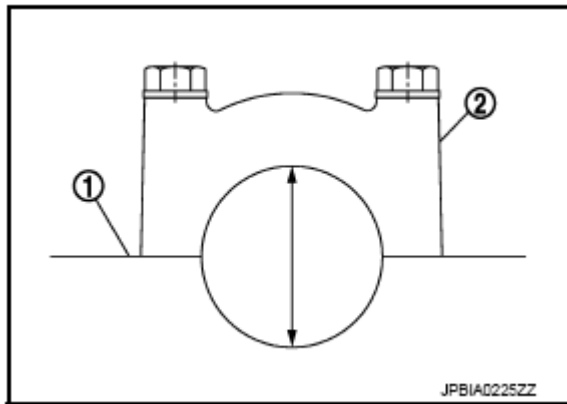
Identifying Main Bearing Housing Inner Diameter
